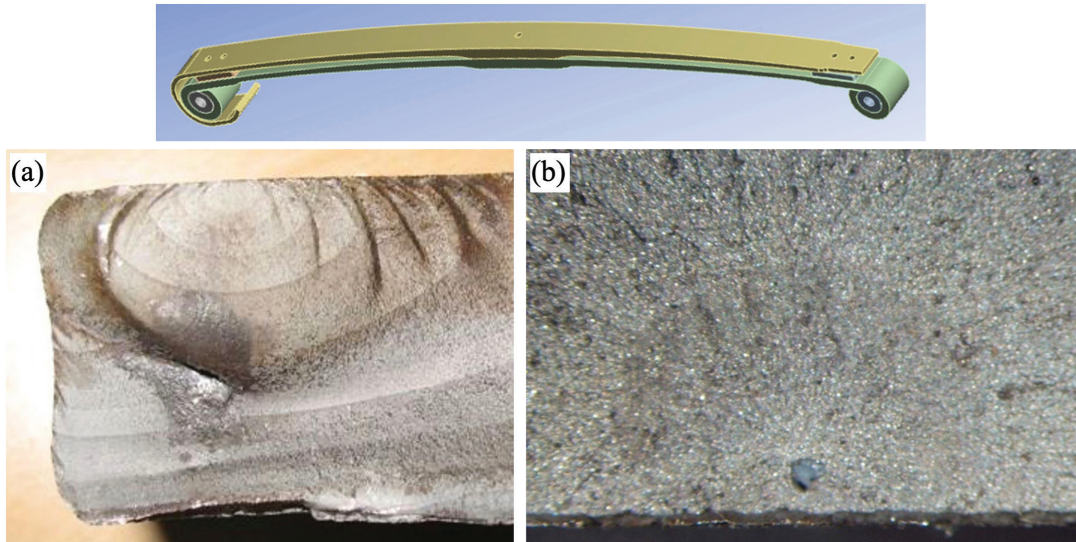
Examples of parabolic springs failed due to fatigue: (a) Spring fracture surface. (b) Fatigue crack initiation from a sub-surface non-metallic inclusion.
